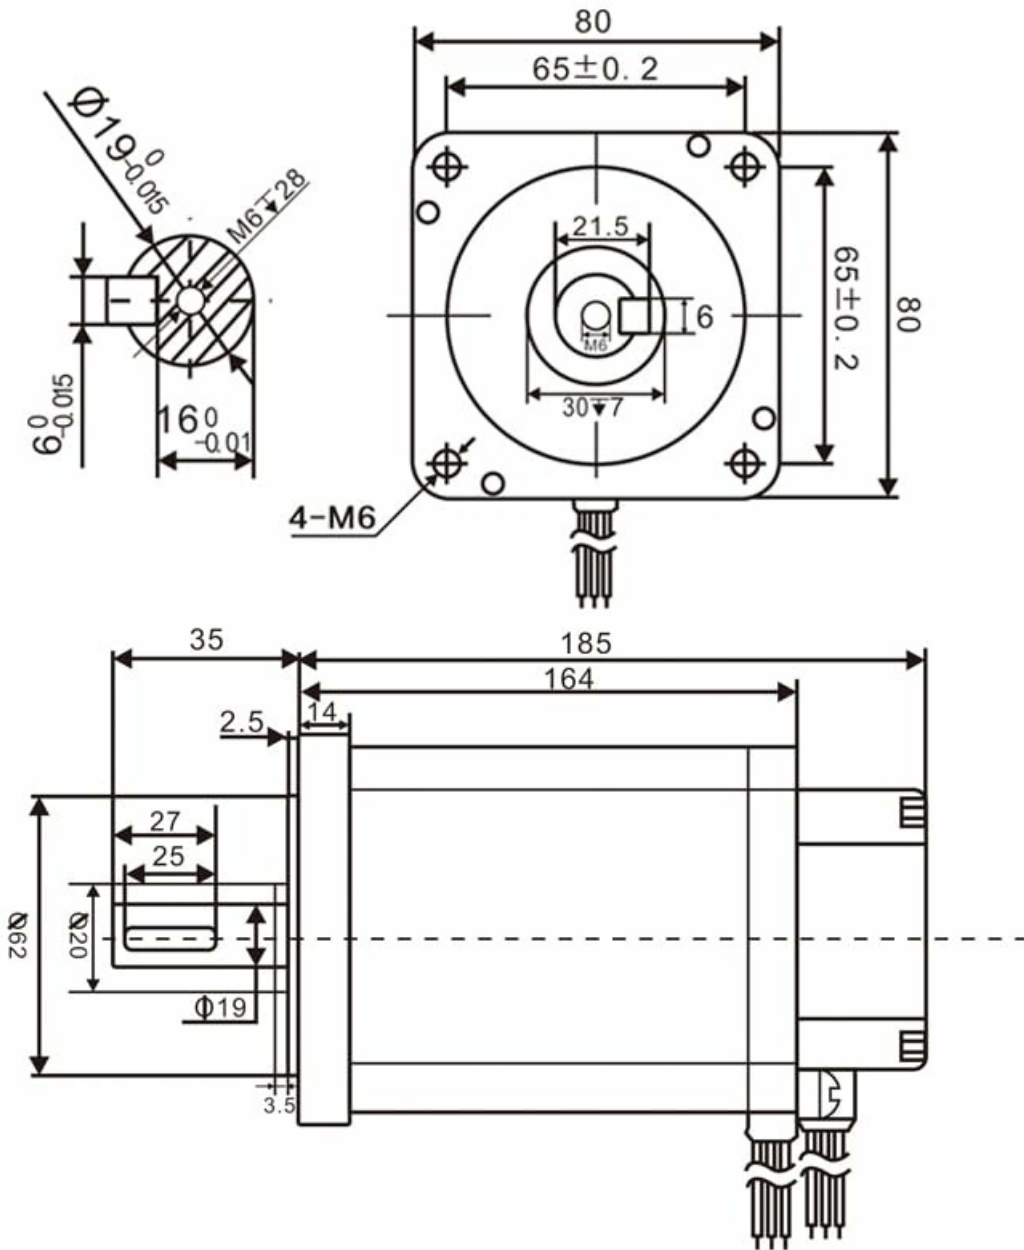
Motor Dimensional Drawing. This diagram illustrates the precise measurements of the motor body, flange, and shaft, including keyway dimensions and mounting hole details.
